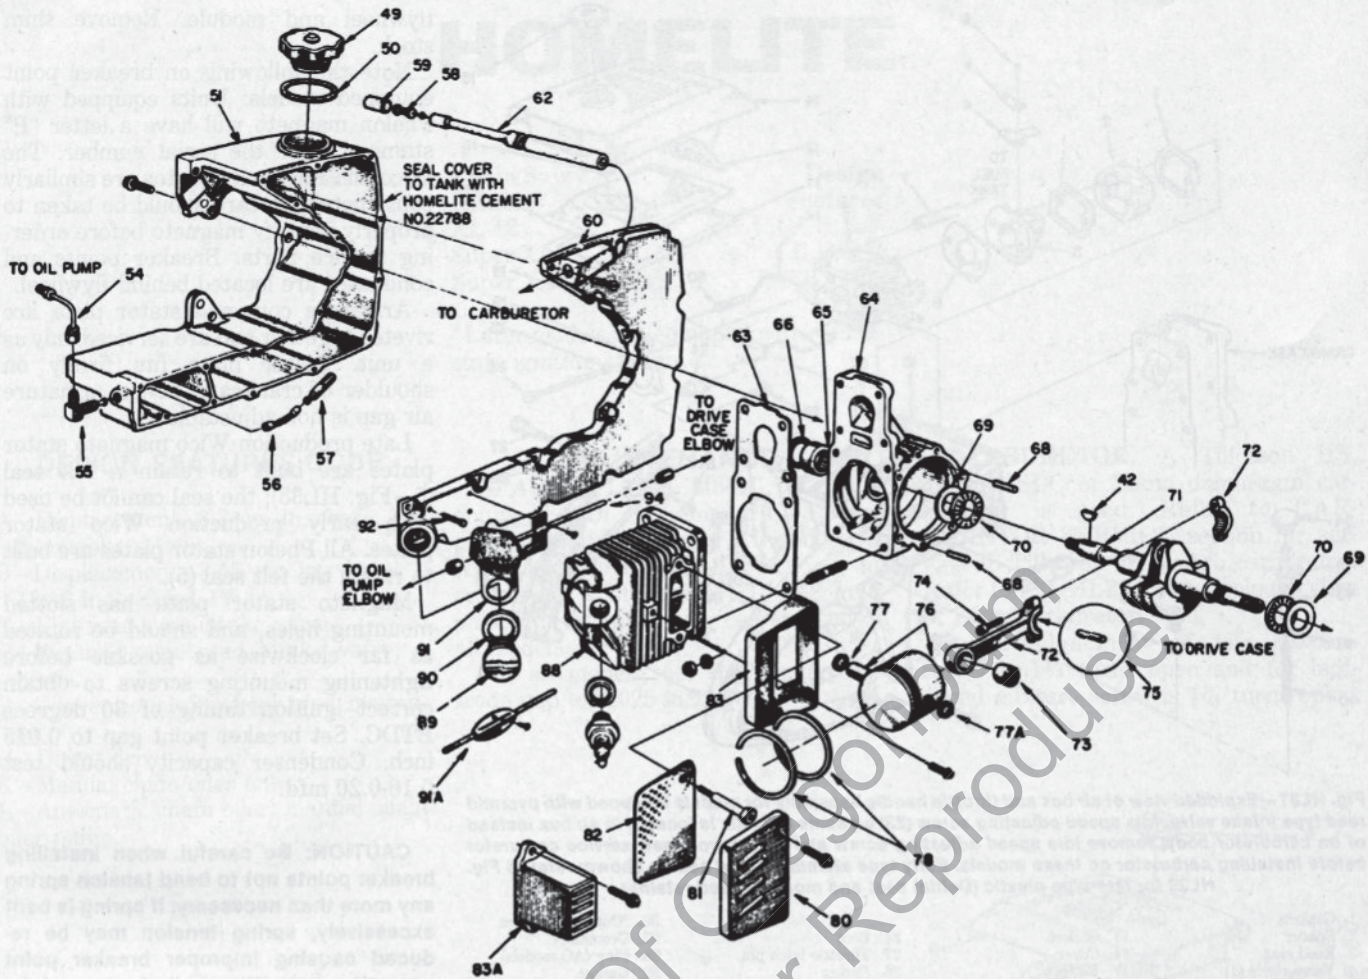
Exploded view showing powerhead and fuel tank construction of Model XL-12; refer to Fig. HL35 for other models. Dowel pins (68) are used on later models. Refer to text. Single or two-piece muffler may be used. Shield (91) is not used on later models.
